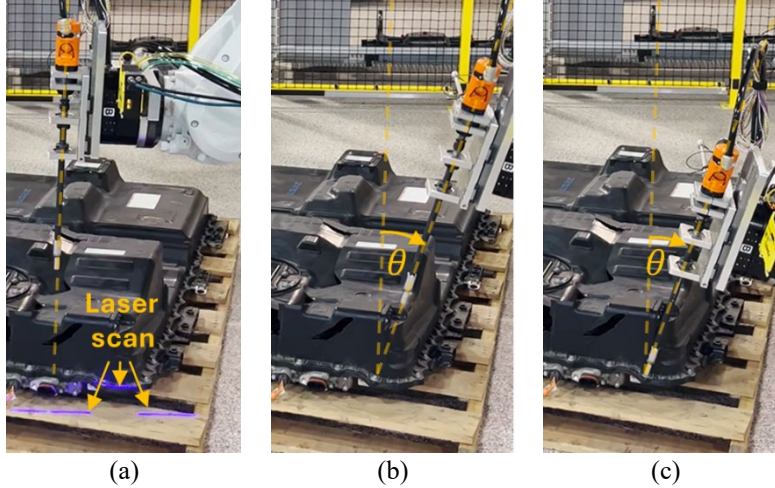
Removal of a tilted fastener (a) laser-scanning (c) tool tilt and approach (d) fastener engaged
